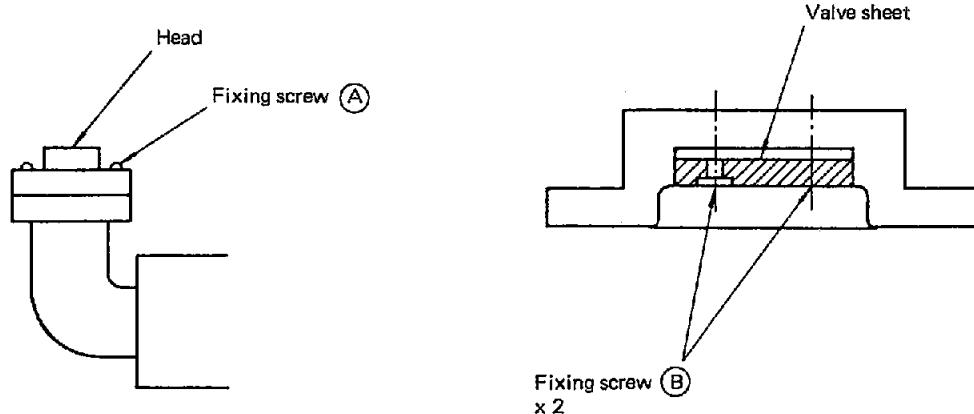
Vacuum Pump for Vacuum Tank (1)
